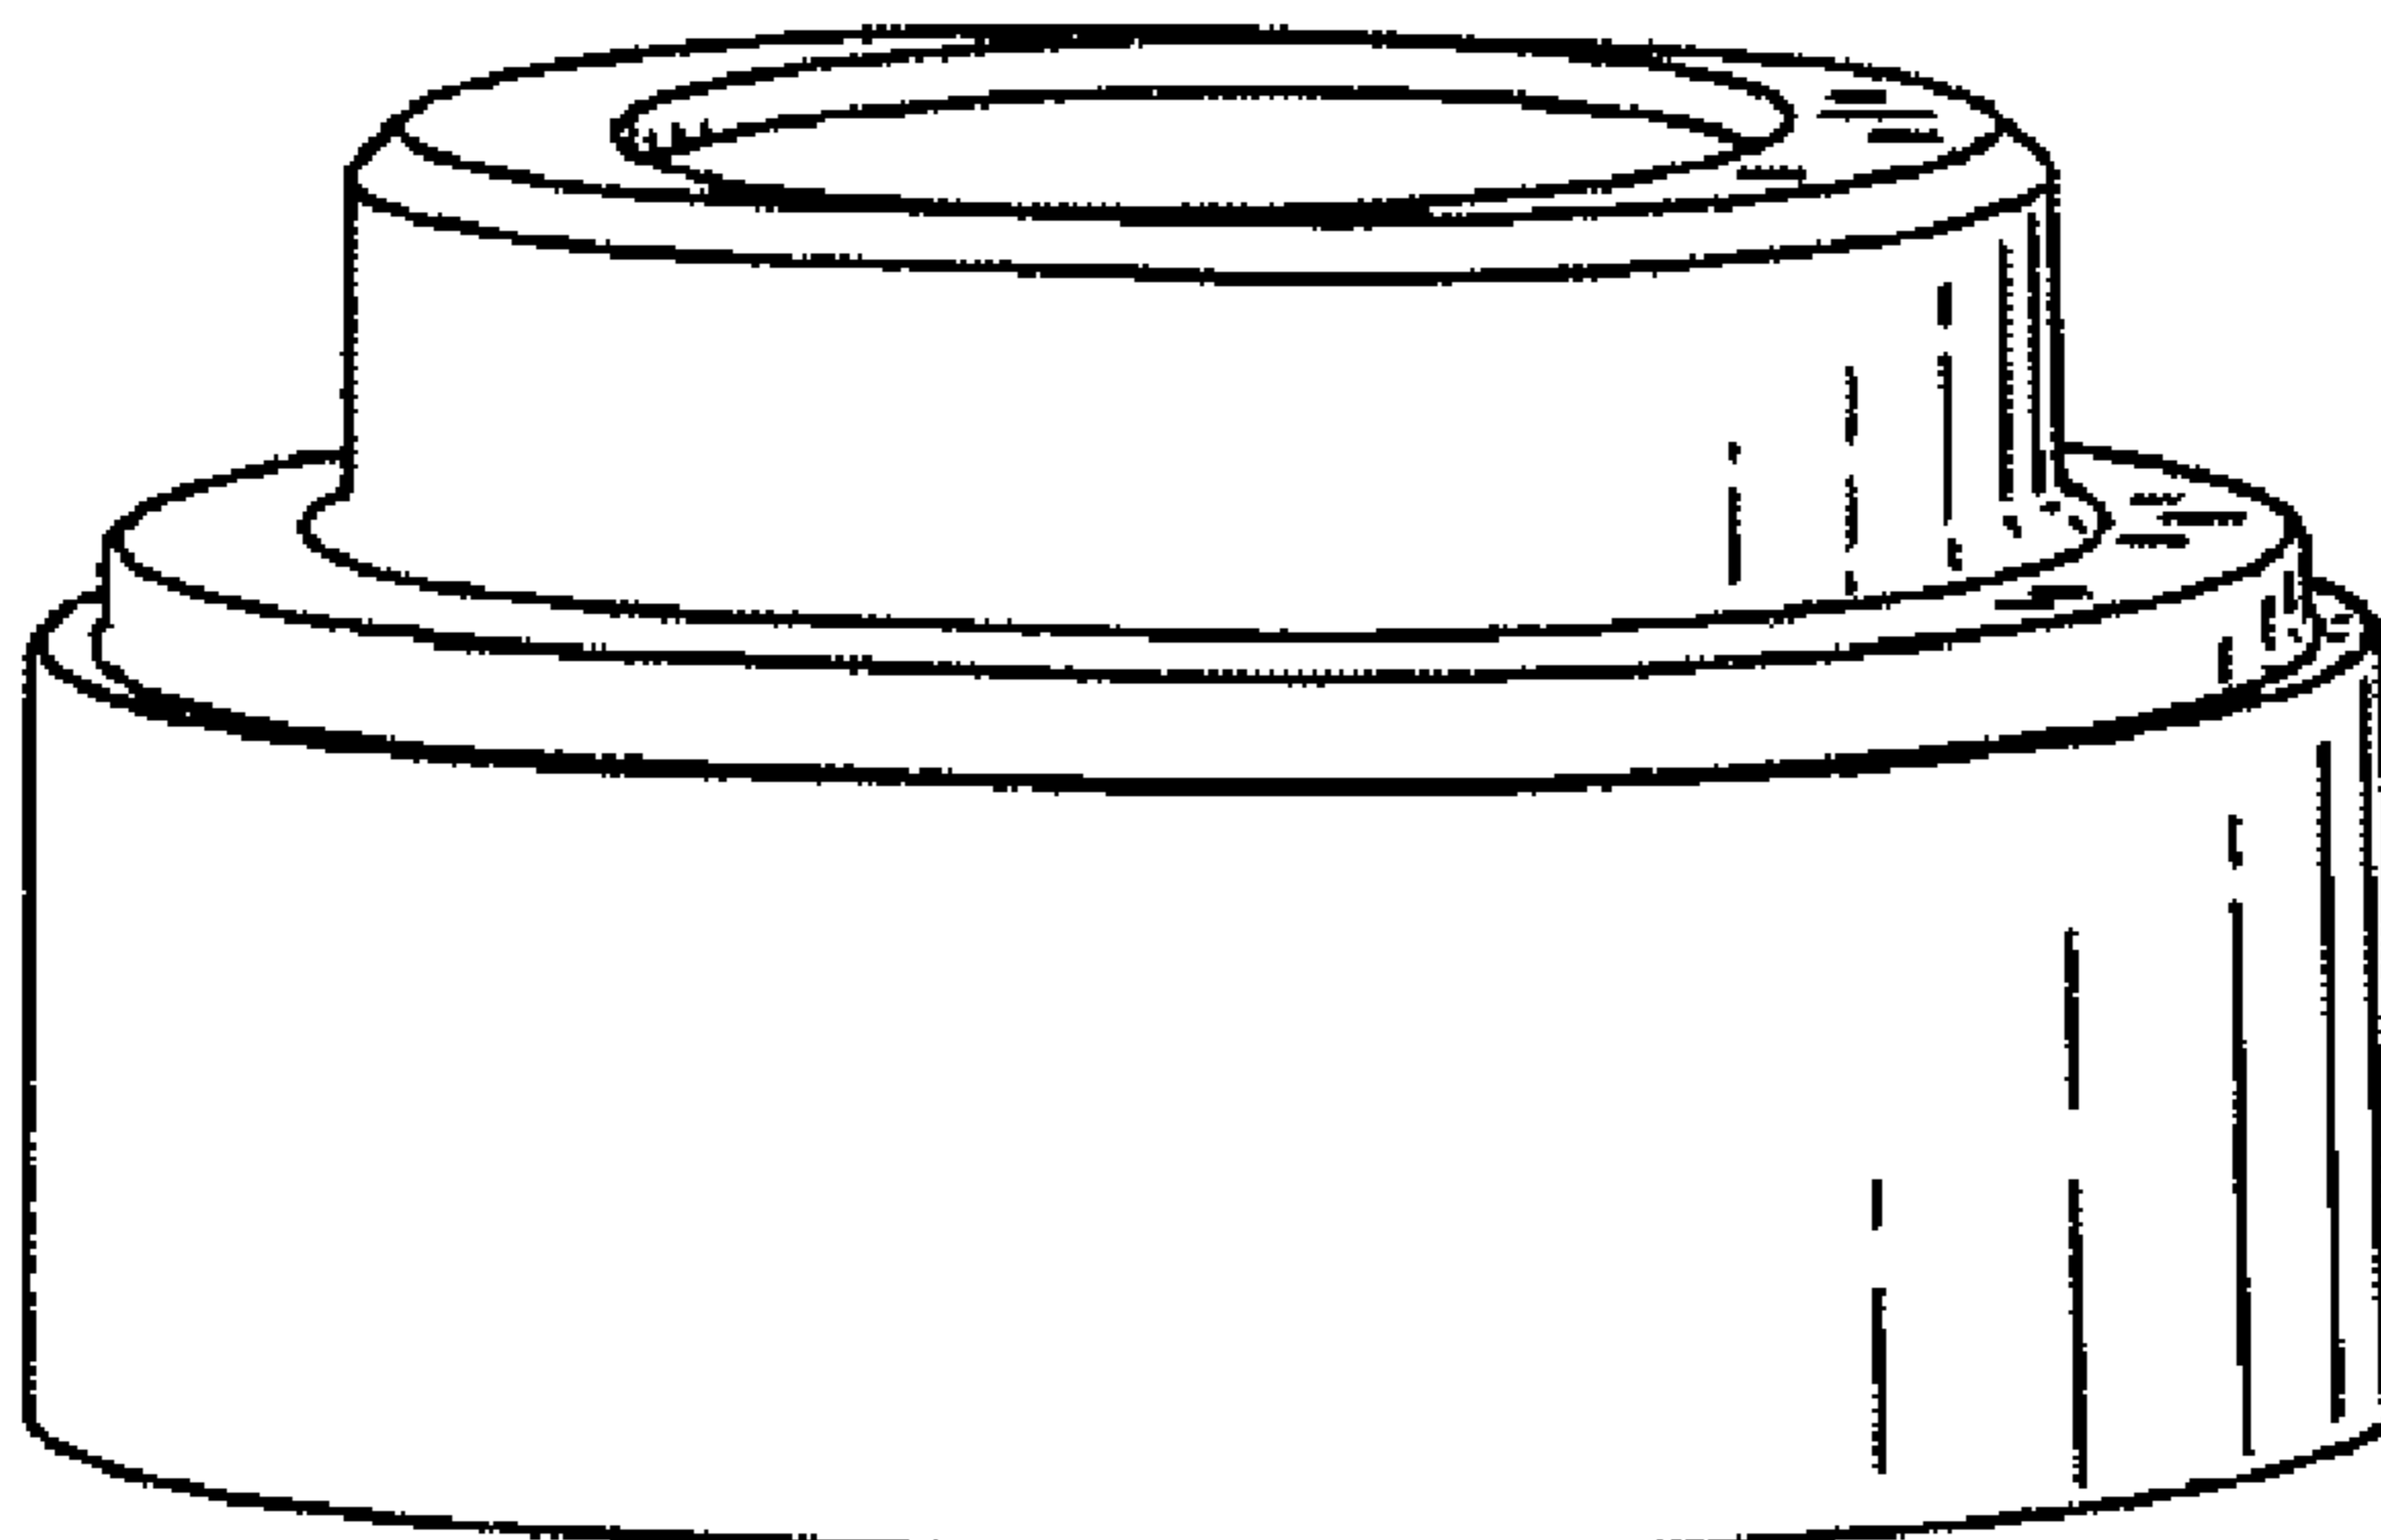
illustrates a side view of an aerosol dispenser cap showing my new design;
